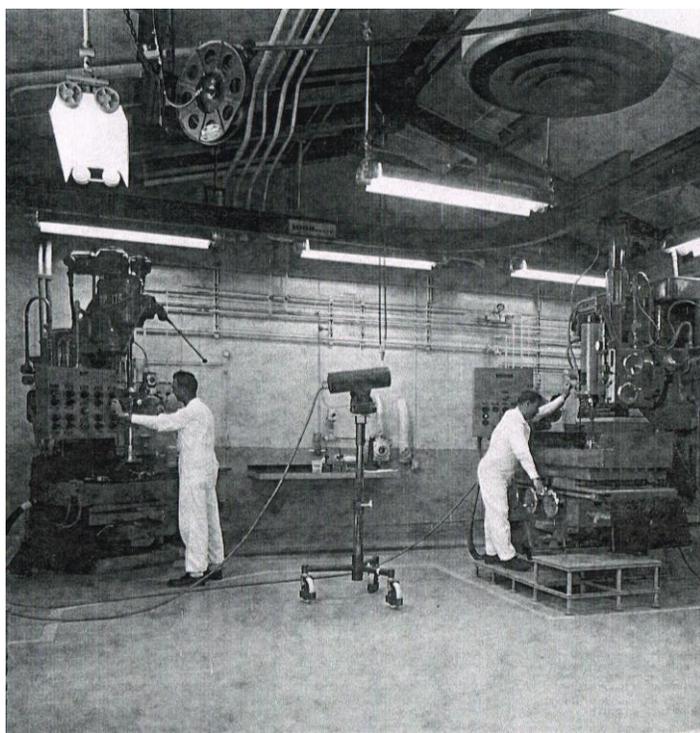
Technicians machining HE components in Room 134 of Building 806B, 1975.
